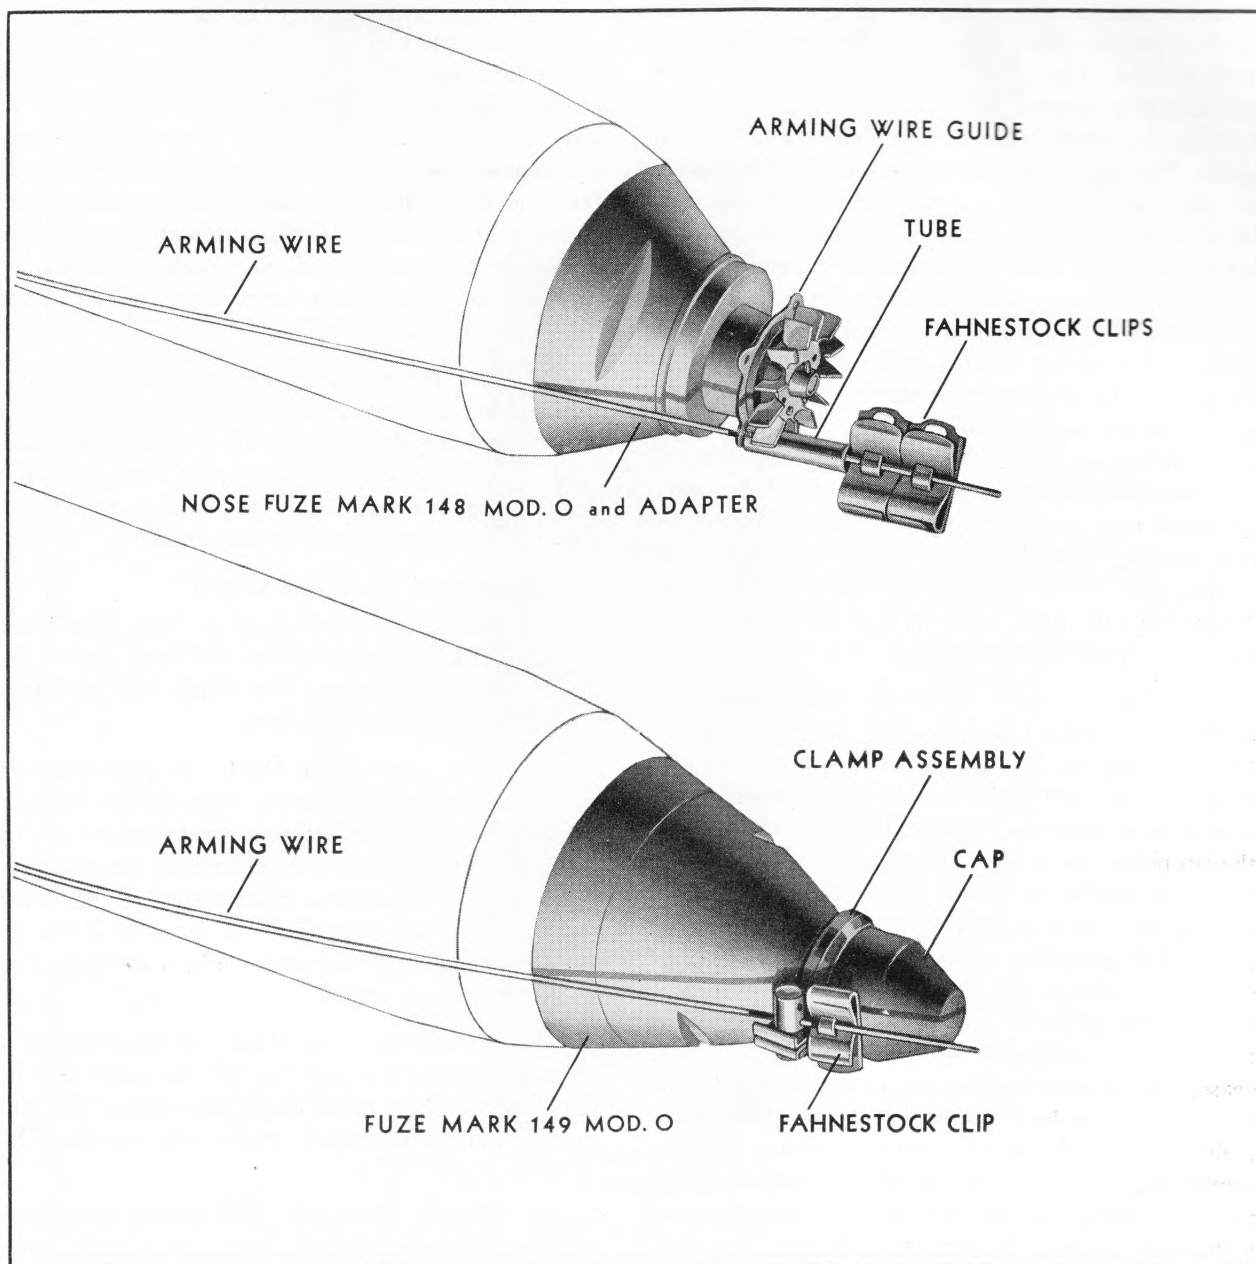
3.5-inch Rocket Heads with Fuzes, HE
